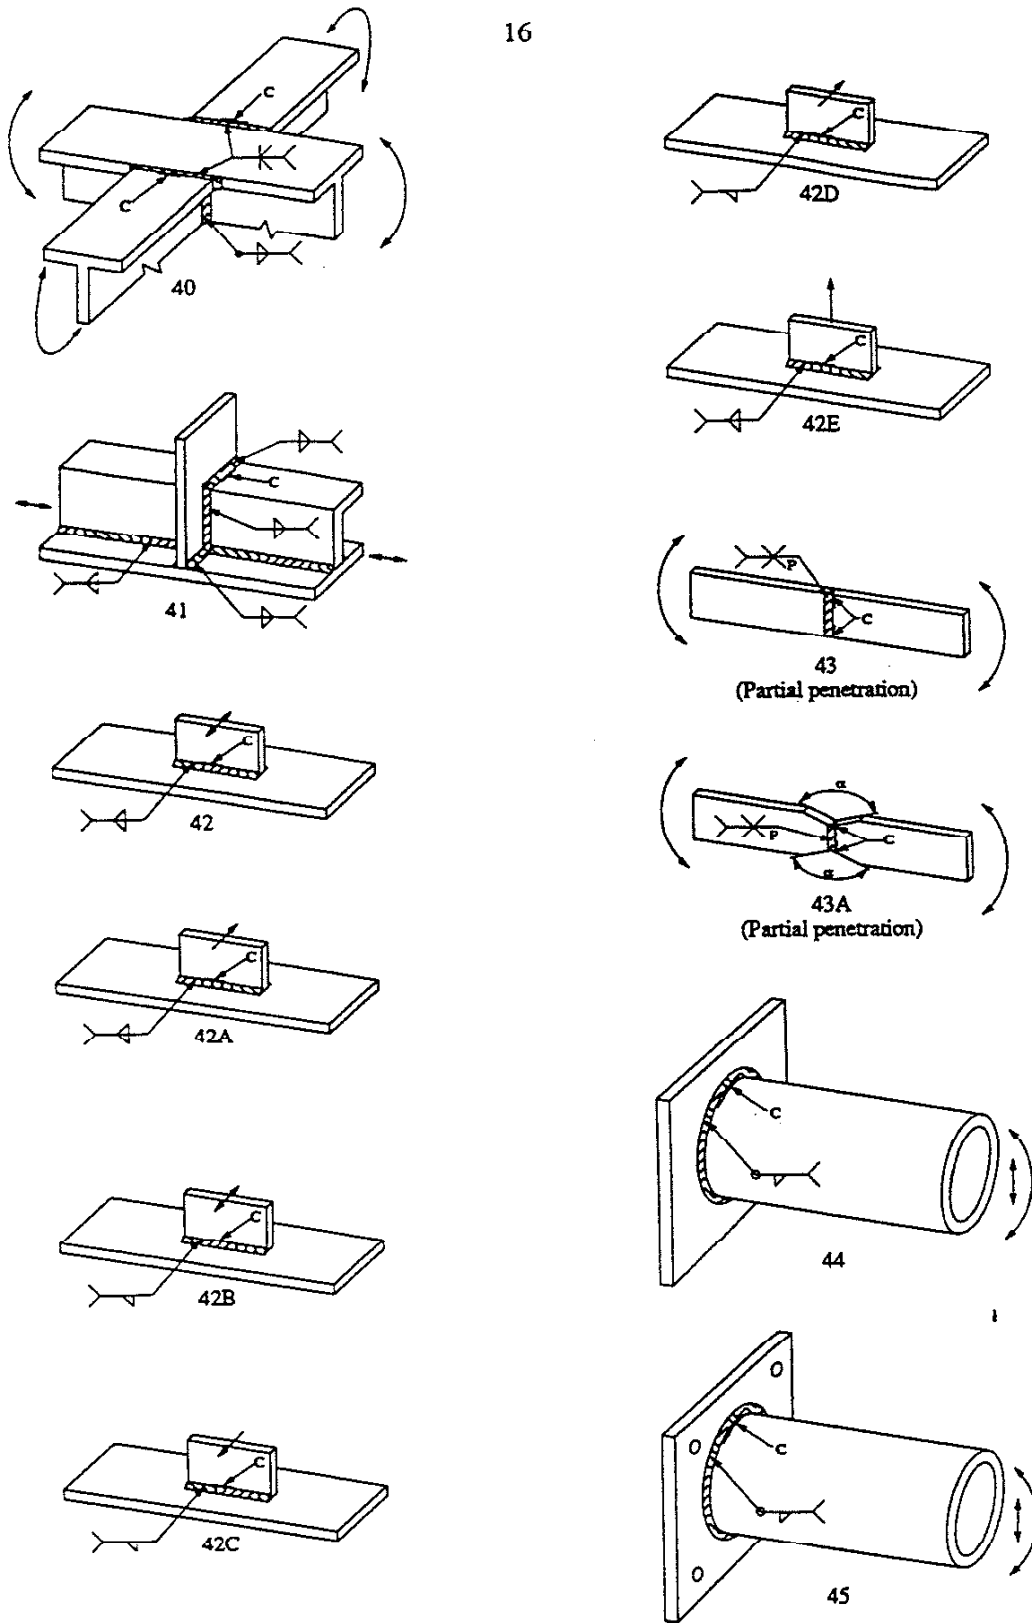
Fifty-three structural details commonly encountered in bridge, ship, and ground-vehicle construction [1].
